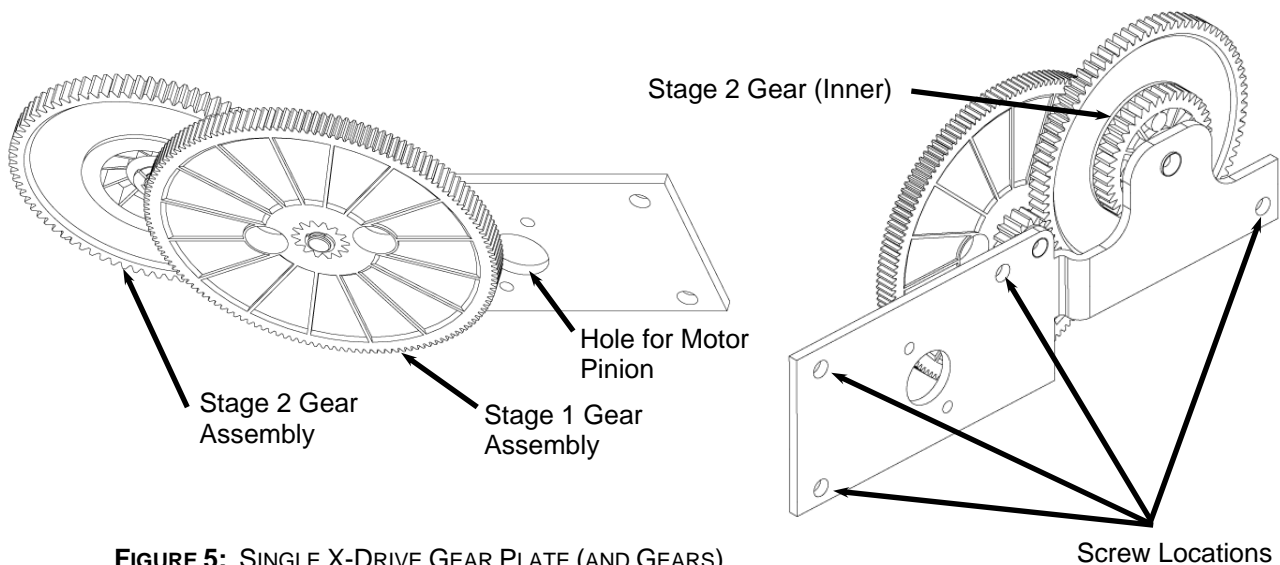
SINGLE X-DRIVE GEAR PLATE (AND GEARS)
